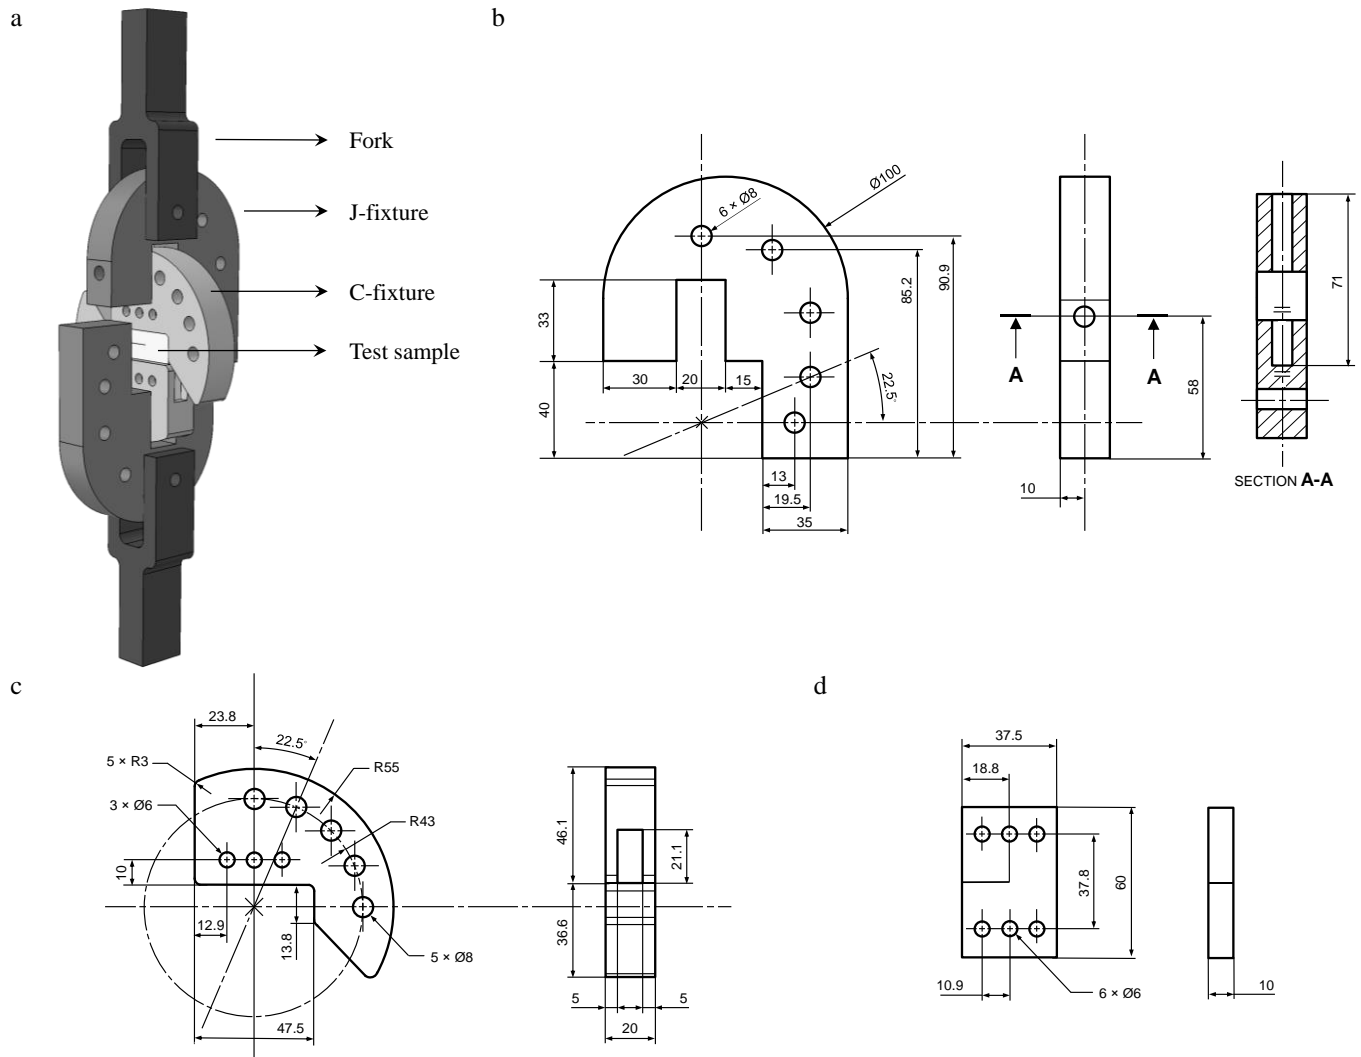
(a) Schematic view of mixed mode I/II/III loading configuration, (b) J-fixture, (c) C-fixture, and (d) CTS specimen (dimensions in mm).
